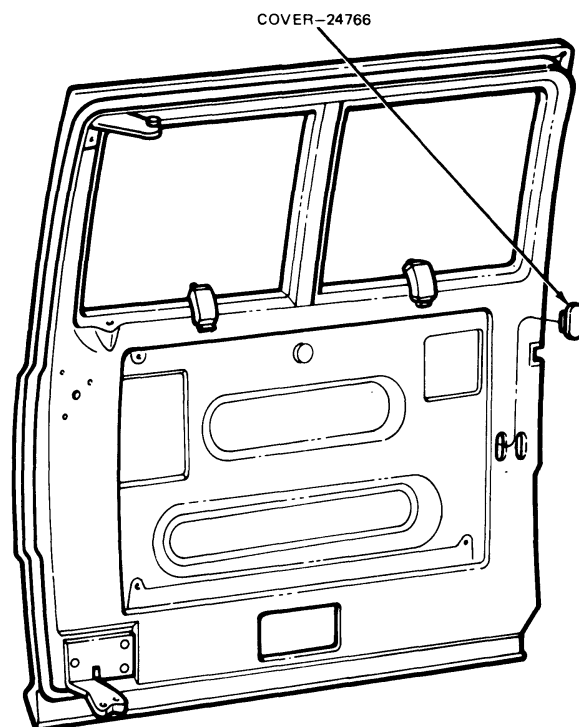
Sliding Door—Access Hole Covers—E-100—E-350
